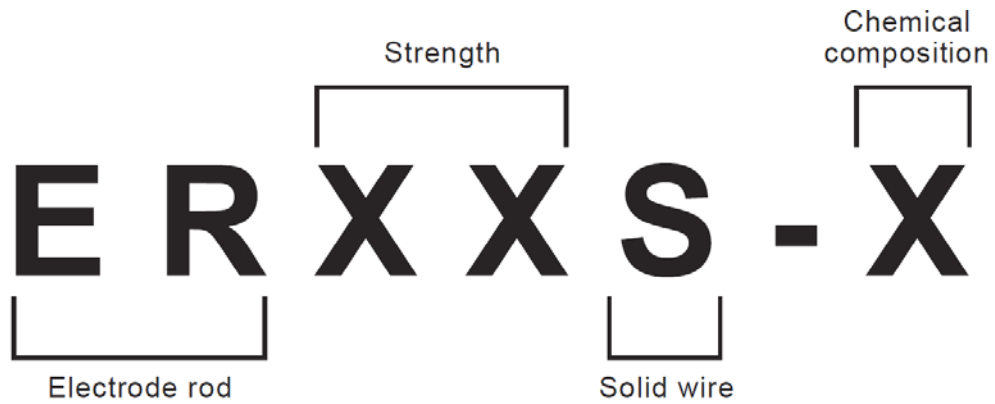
GMAW/GTAW Welding Electrode Identification System
